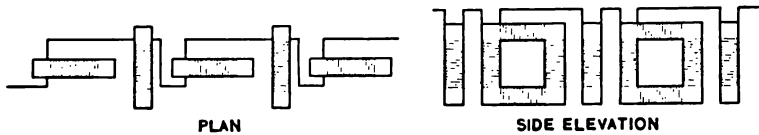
Outline sketch of one coil. Dimensions in millimeters.
